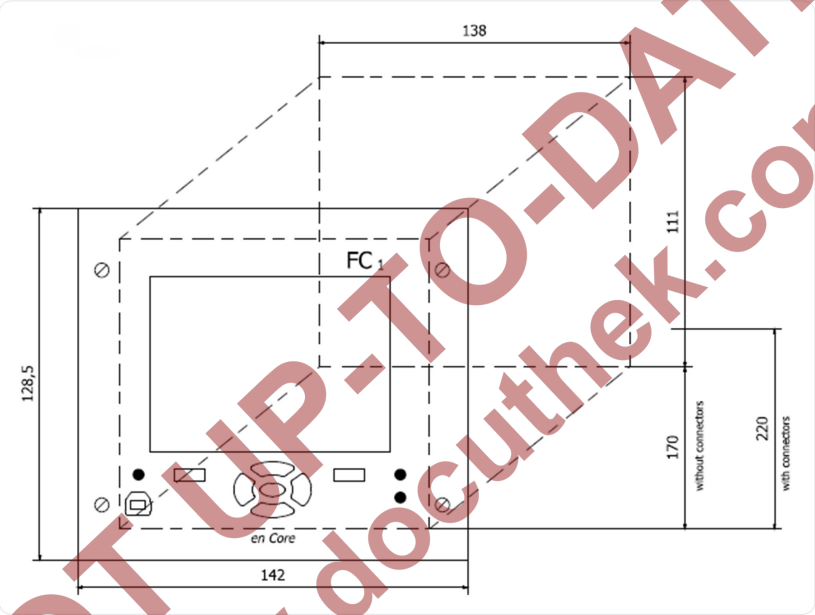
Dimensions for plug-in module 19", 3 U, 28 HP
